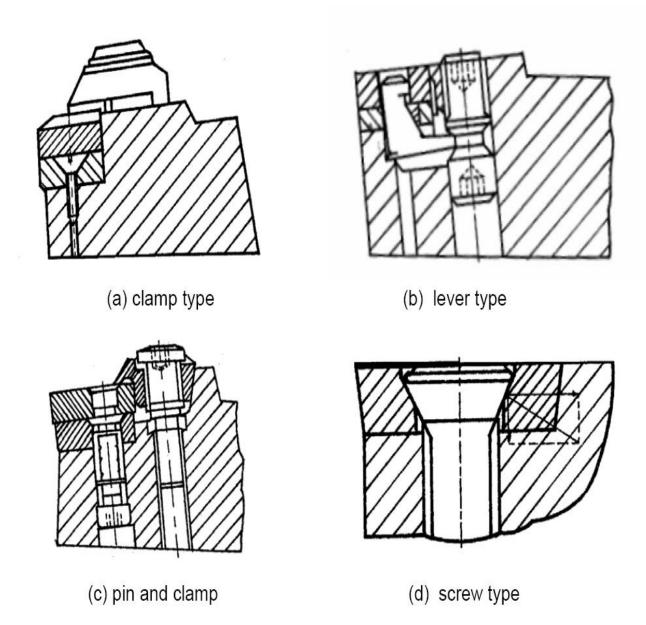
Mounting of tool inserts in tool holders by mechanical clamping.
